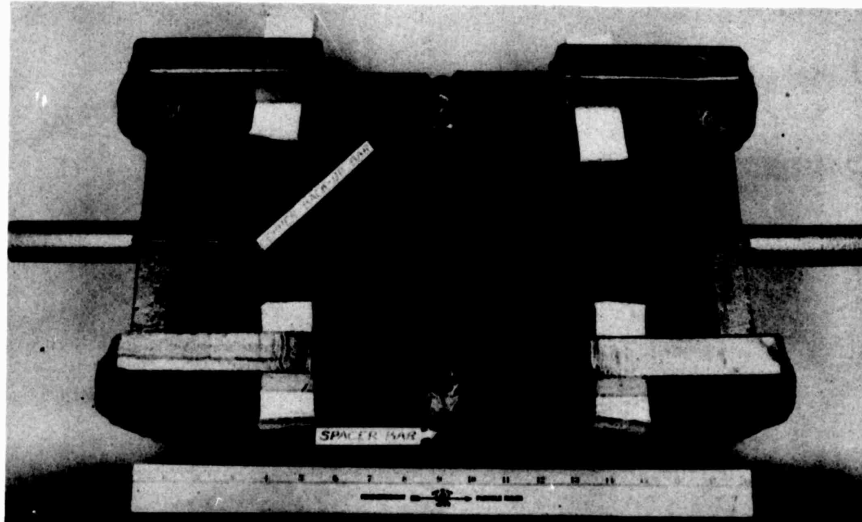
Test Plate Clamped in Jig, Ready for Welding
